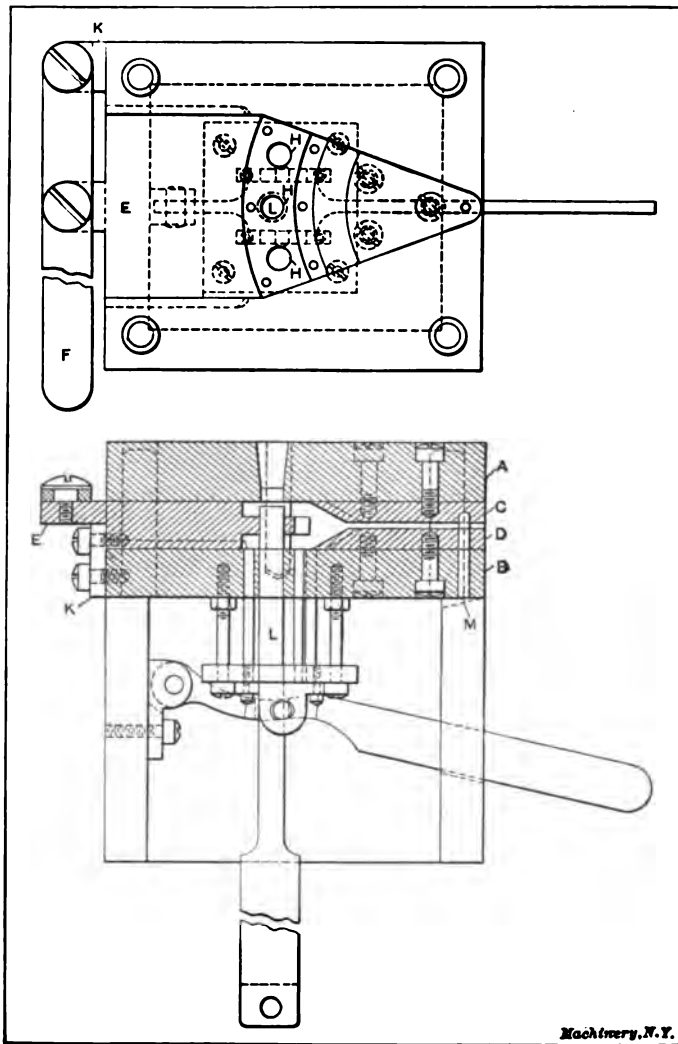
Casting-die for Making Castings with Inserted Pieces like that shown in Fig. 12
